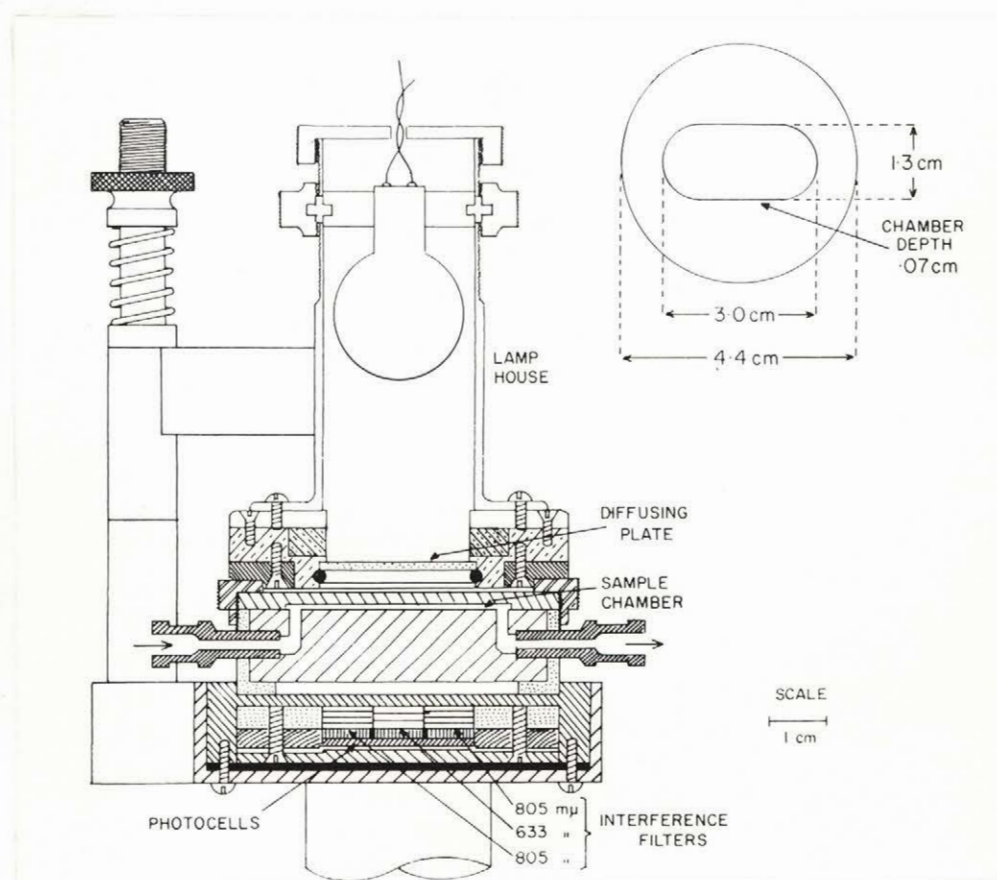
Cross section of cuvette assembly. Inset shows the dimensions of the sample chamber.
